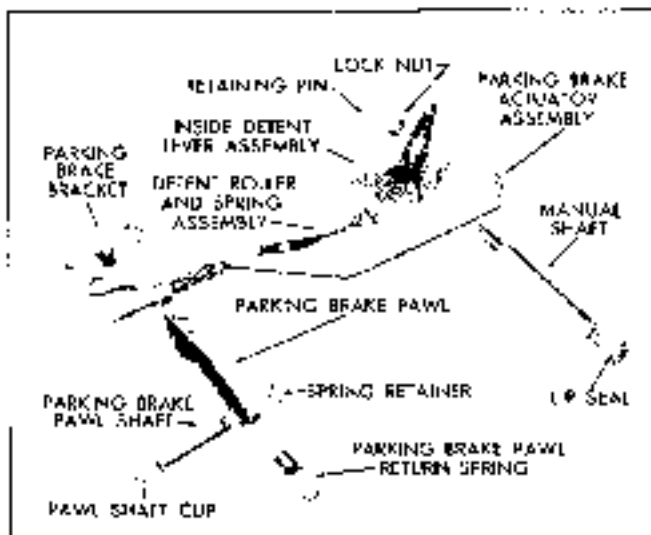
E-121 Exploded View of Manual and Parking Linkage
